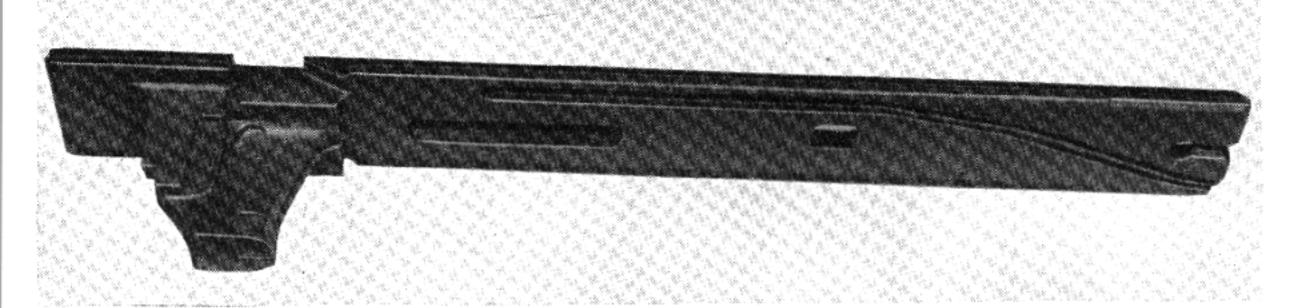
Operating slide of VYa Gun, showing groove for stud of belt feed. Large lug at left fits in hollow portion of bolt.
